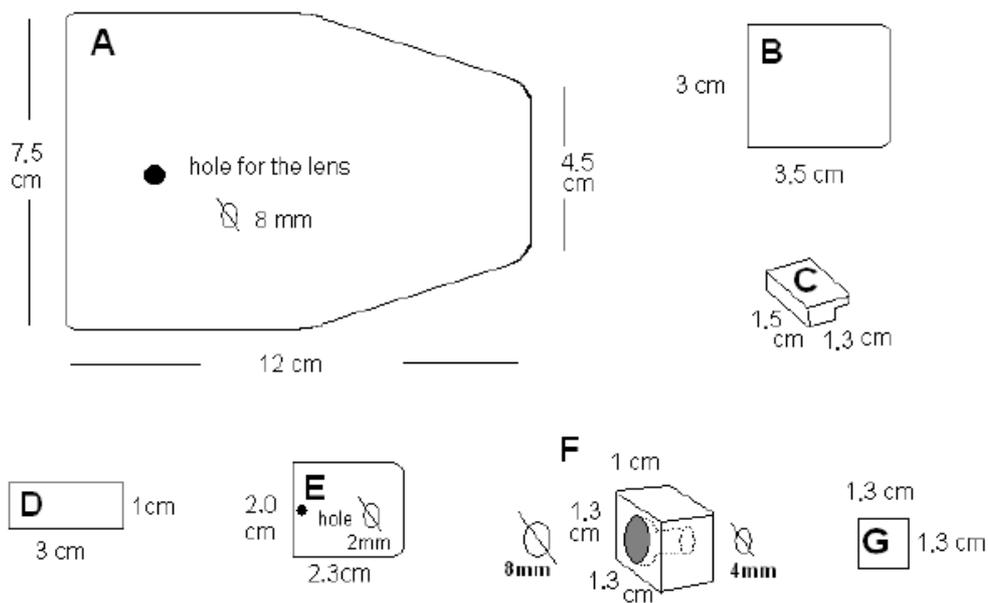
Dimensions of acrylic pieces needed to build the microscope. The pieces A, B, D, E and G are made with 3 mm thick acrylic, and the pieces C and F are made with 10 mm thick acrylic.
